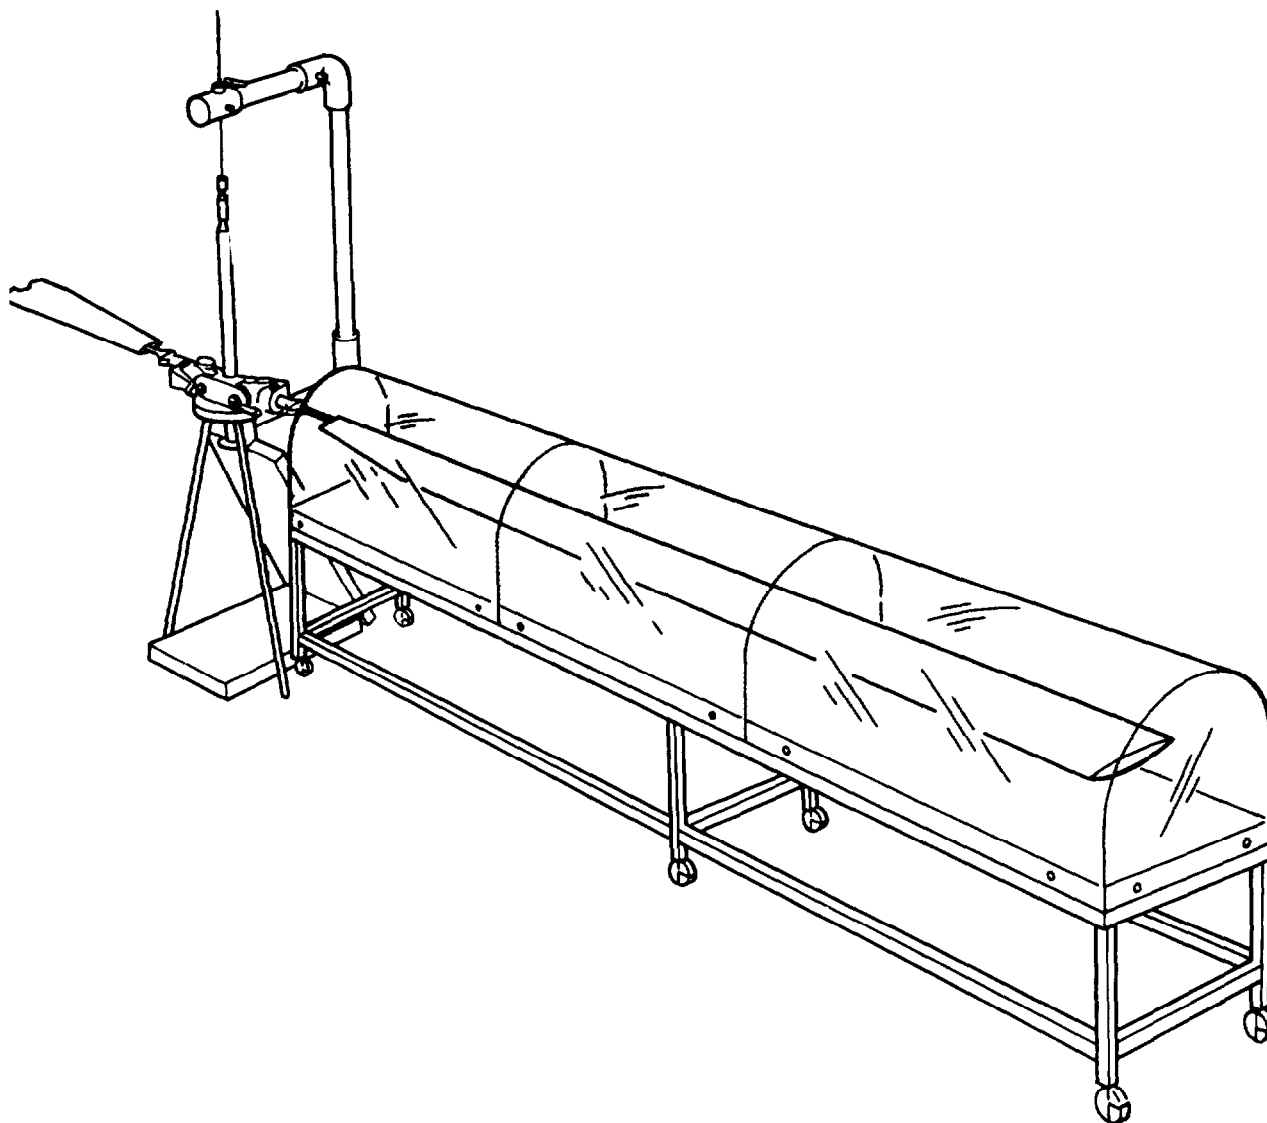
Shroud for Protection of Assembly Being Balance Checked in Drafty Area.
